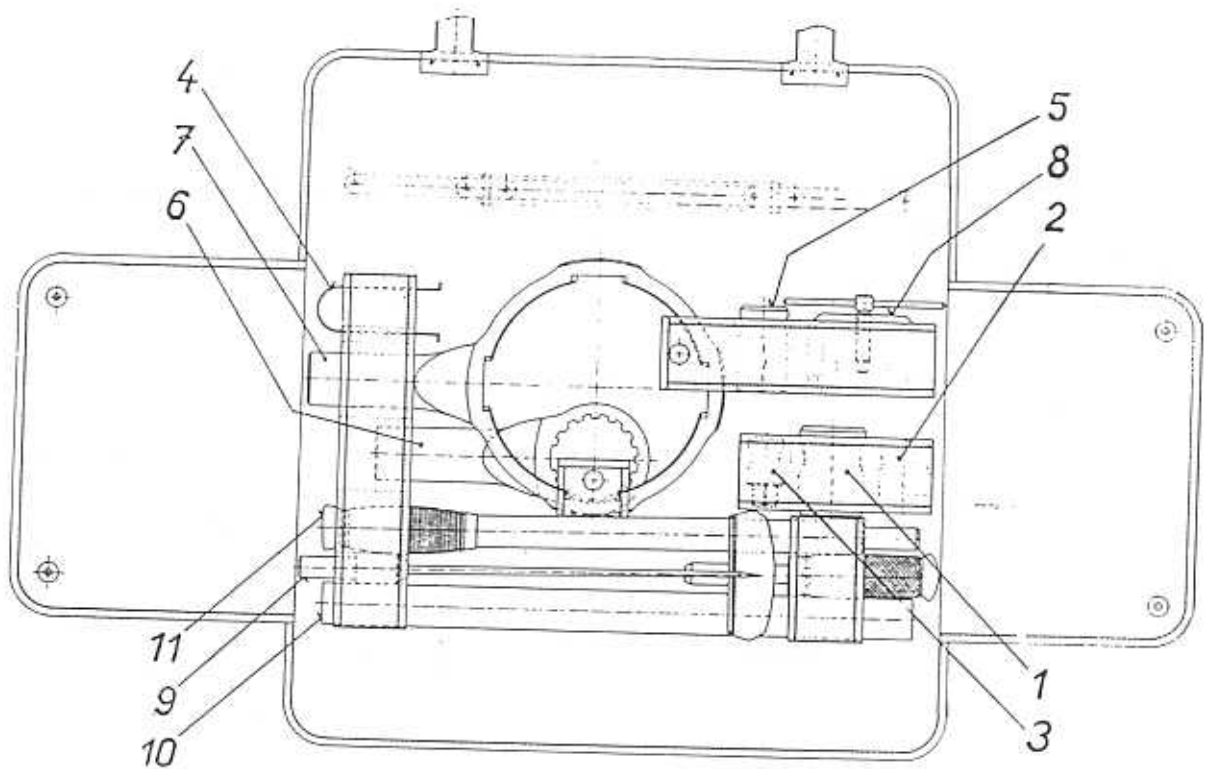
Mounting tools of the V 520 propeller — set "B" in the kit
